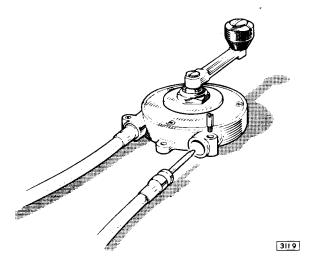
Aerial winder mechanism—showing the cable sleeve and drive withdrawn.
